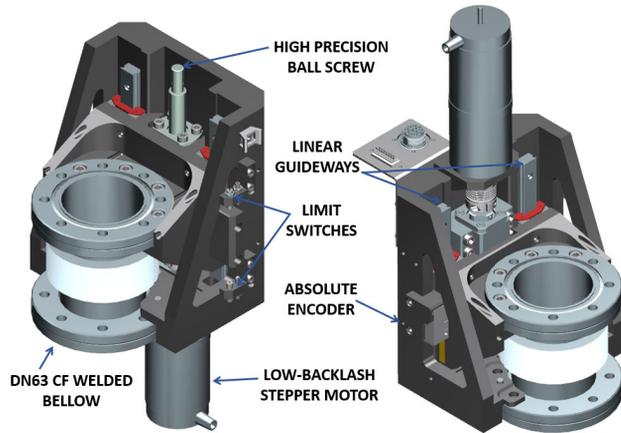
Motion stage assembly. FSM2 and FSM1 arrangement (left), FSM1 arrangement (right).
